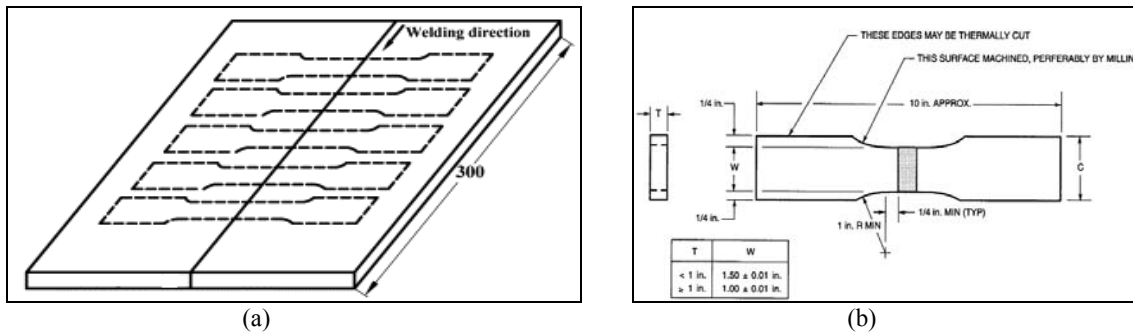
(a) The layout of the specimens before of cutting, (b) The detail of the standard specimens [22]
